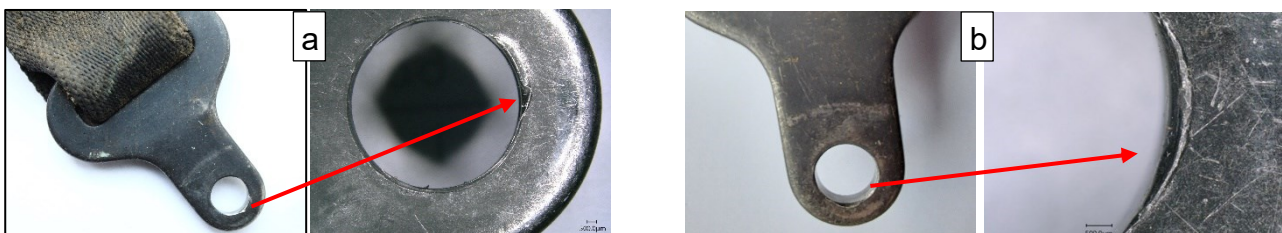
Rear side of clamps on shoulder seat belts; (a) right seat belt; (b) left seat belt
